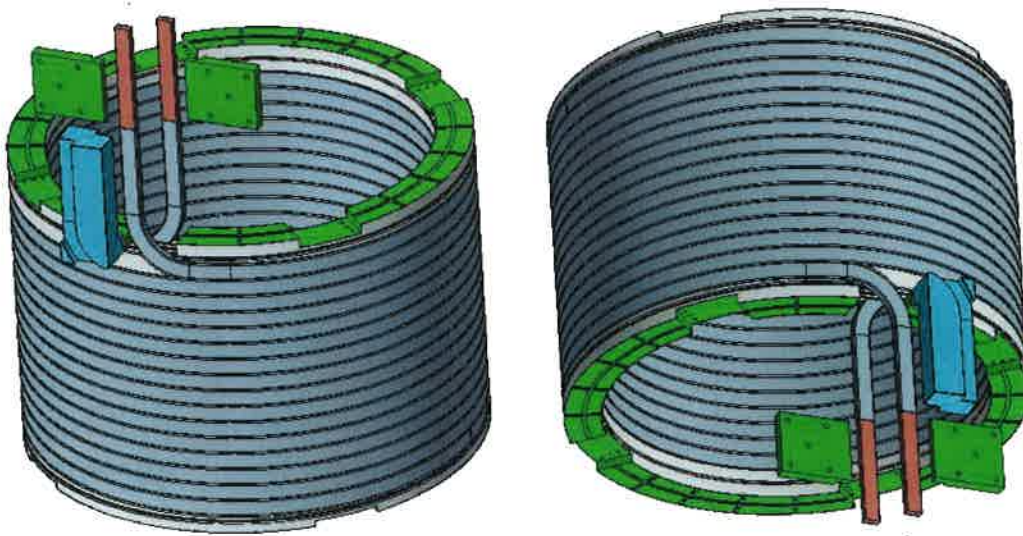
Inner PF Coil winding 1a upper (left) & 1a lower (right)
